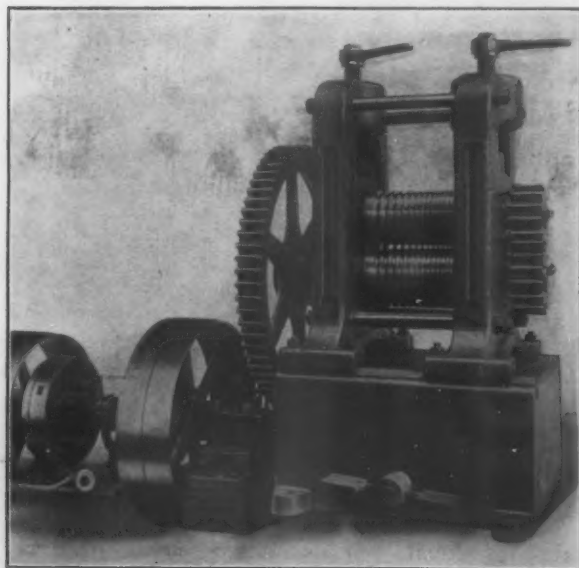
Back-Pointing and Cold-Rolling Mill.
